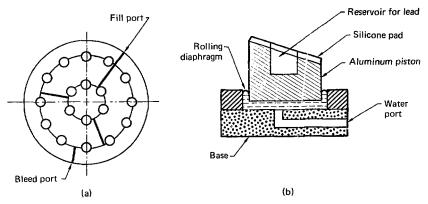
Hydraulic mirror mount (a) top view showing hydraulic lines; and (b) detail of piston assembly.
